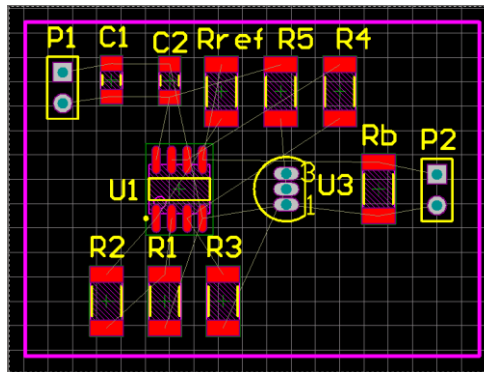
ARRANGED COMPONENTS ON PRINTED MATTER.
